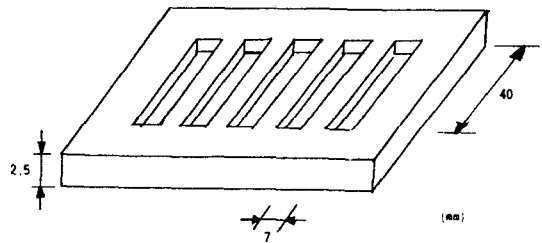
Diagram of Metal mold for making the acrylic resin specimens.
